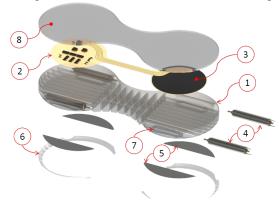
An exploded view of the assembly showing the following components: 1) Soft, flexible body. 2) Flexible circuit board for wiring, controller and other electronics. 3) Flexible battery. 4) Motors for actuation. 5) Friction elements that act to hold a particular section of the body in place. 6) Slip elements that provides a surface for the robot to drag a particular section of the body. 7) Embedded haptic sensing. 8) Encapsulation.
